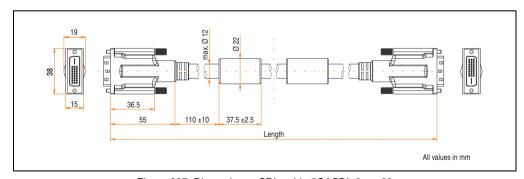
Dimensions - SDL cable 5CASDL.0xxx-03
